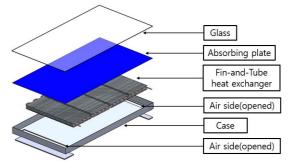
Exploded view of hybrid solar collector with a fin-and-tube heat exchanger.
